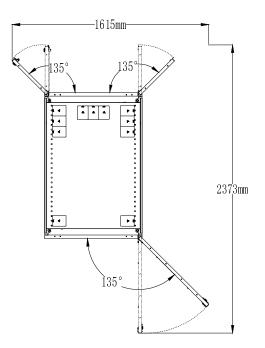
Space required to open the front and rear door of the rack (overlooking, unit: mm)
